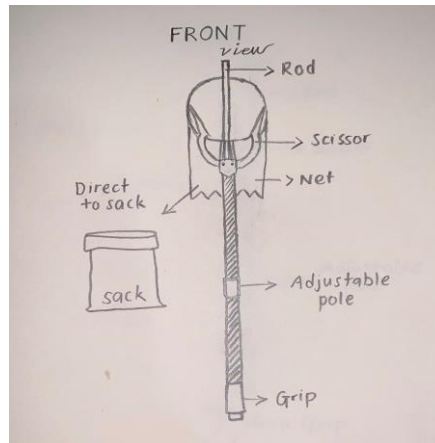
Sketch of the Front View of the Portable Black Pepper Collector.
